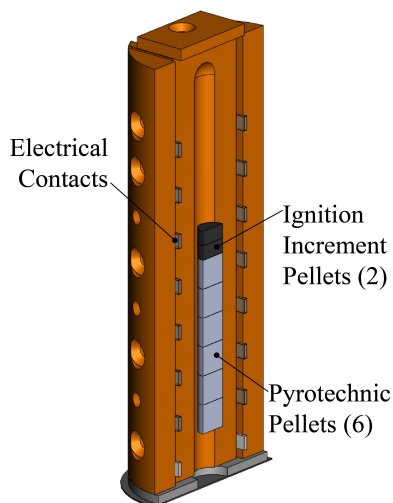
Illustration of test sample consisting of six pyrotechnic pellets, two ignition increment pellets, and the strand support assembly.
